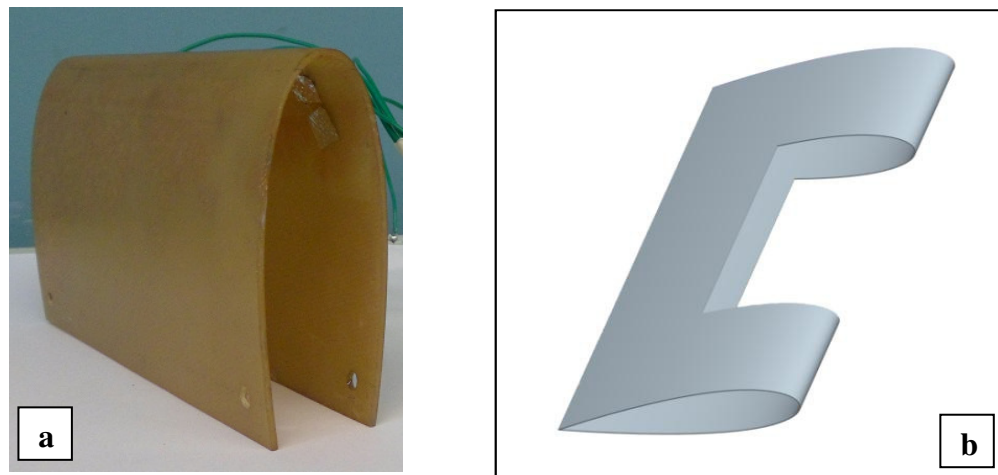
(a) polymer composite airfoil insert; (b) aluminum fixture for mounting composite airfoil insert [1].
